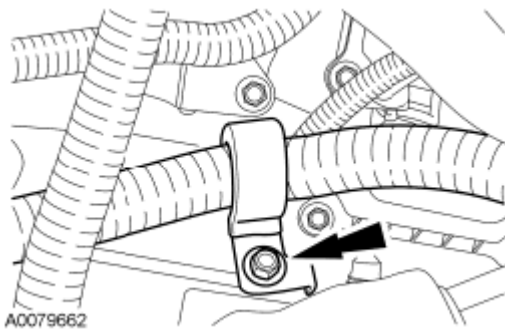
Locating Starter Wiring Harness Support Bracket And Bolt
